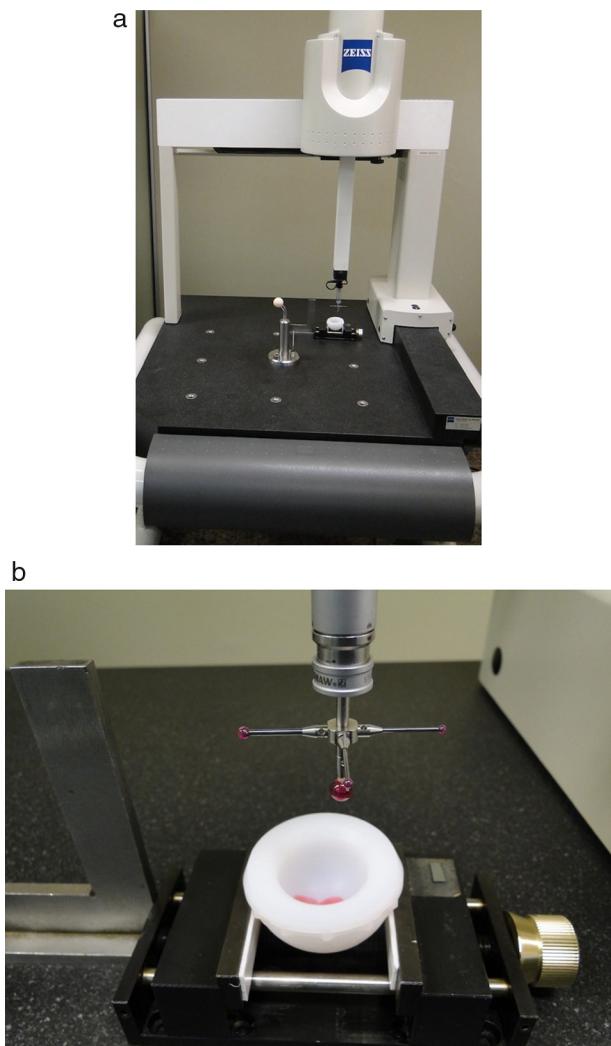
Carl Zeiss device used for making the measurements: (a) in general view and (b) focused.
